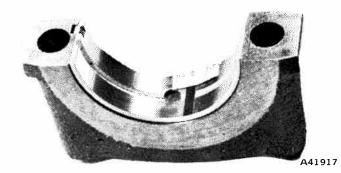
A-47 Checking Main Bearing Clearance With Plastigage
